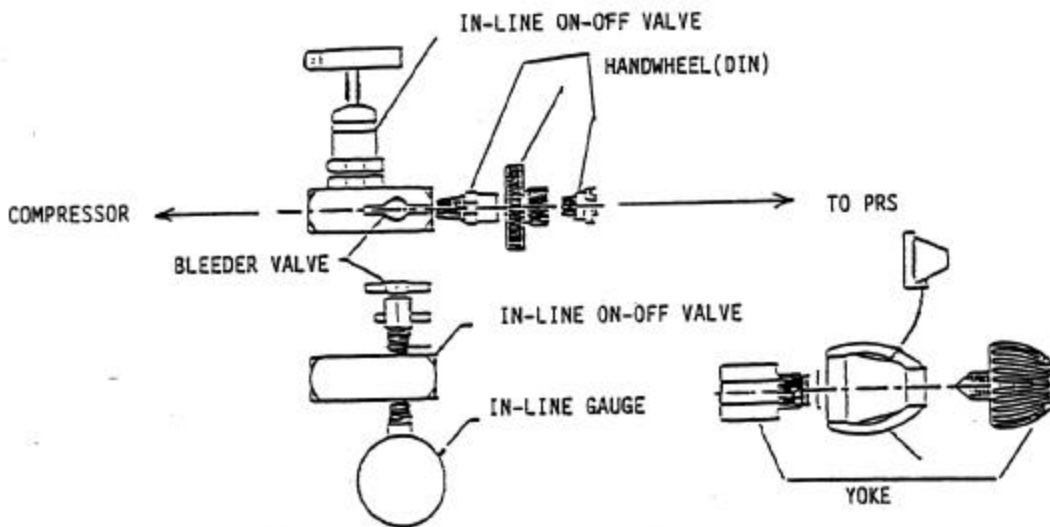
Connection of Compressor to PRS Supply Cylinder with Compressor Adapter
